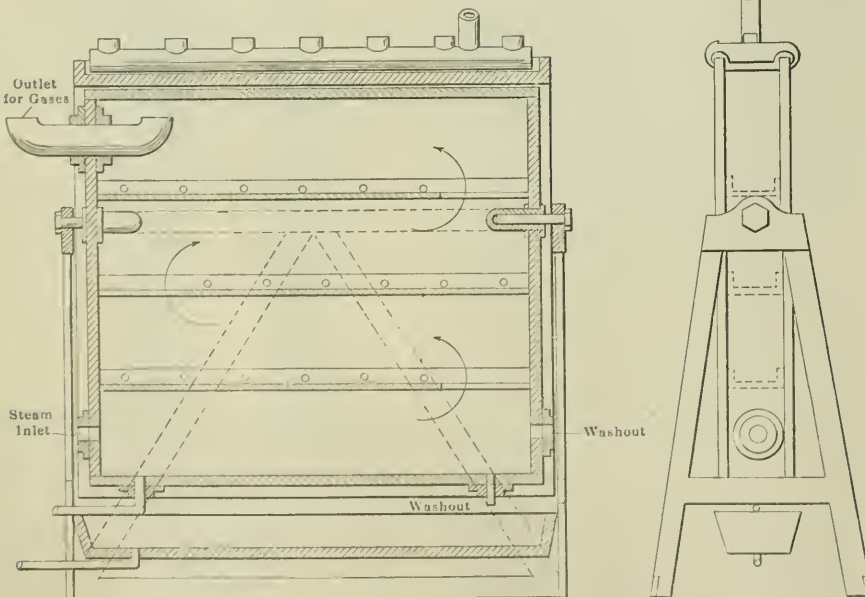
SINGLE UNIT OF PENNELL FLASK-TYPE STEAM CONDENSER
